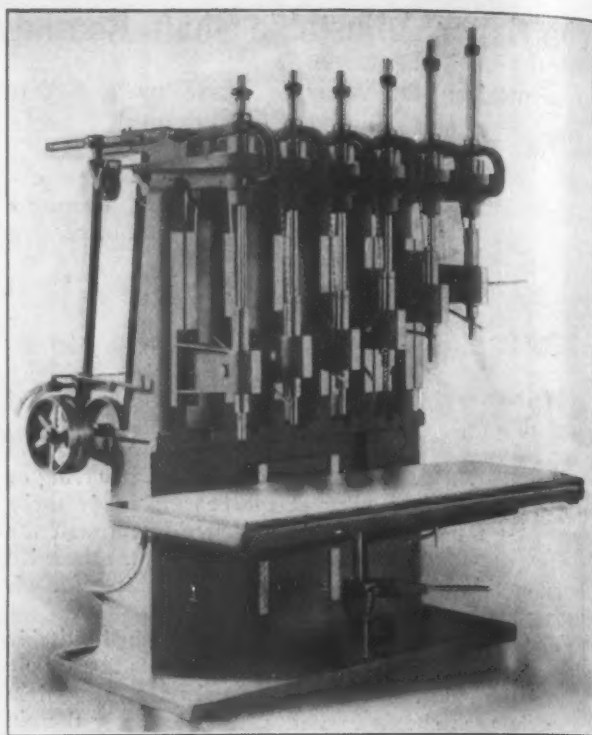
The No. 6 Ball Bearing Drilling Machine for Automobile Builders.
